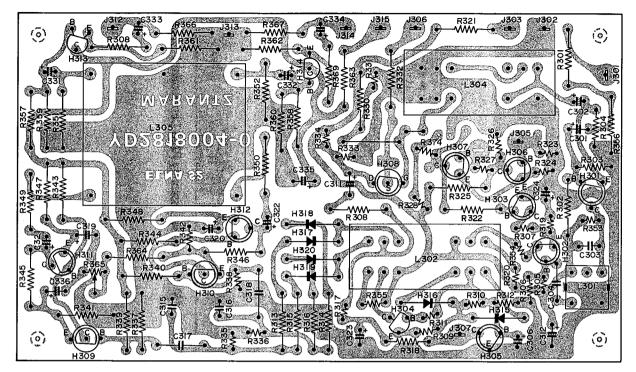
MPX Stereo Decoding Amplifier Assembly P300 Component Locations
